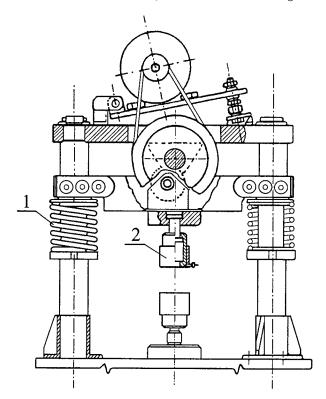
Scheme of the machine for fatigue testing of thread joints.
